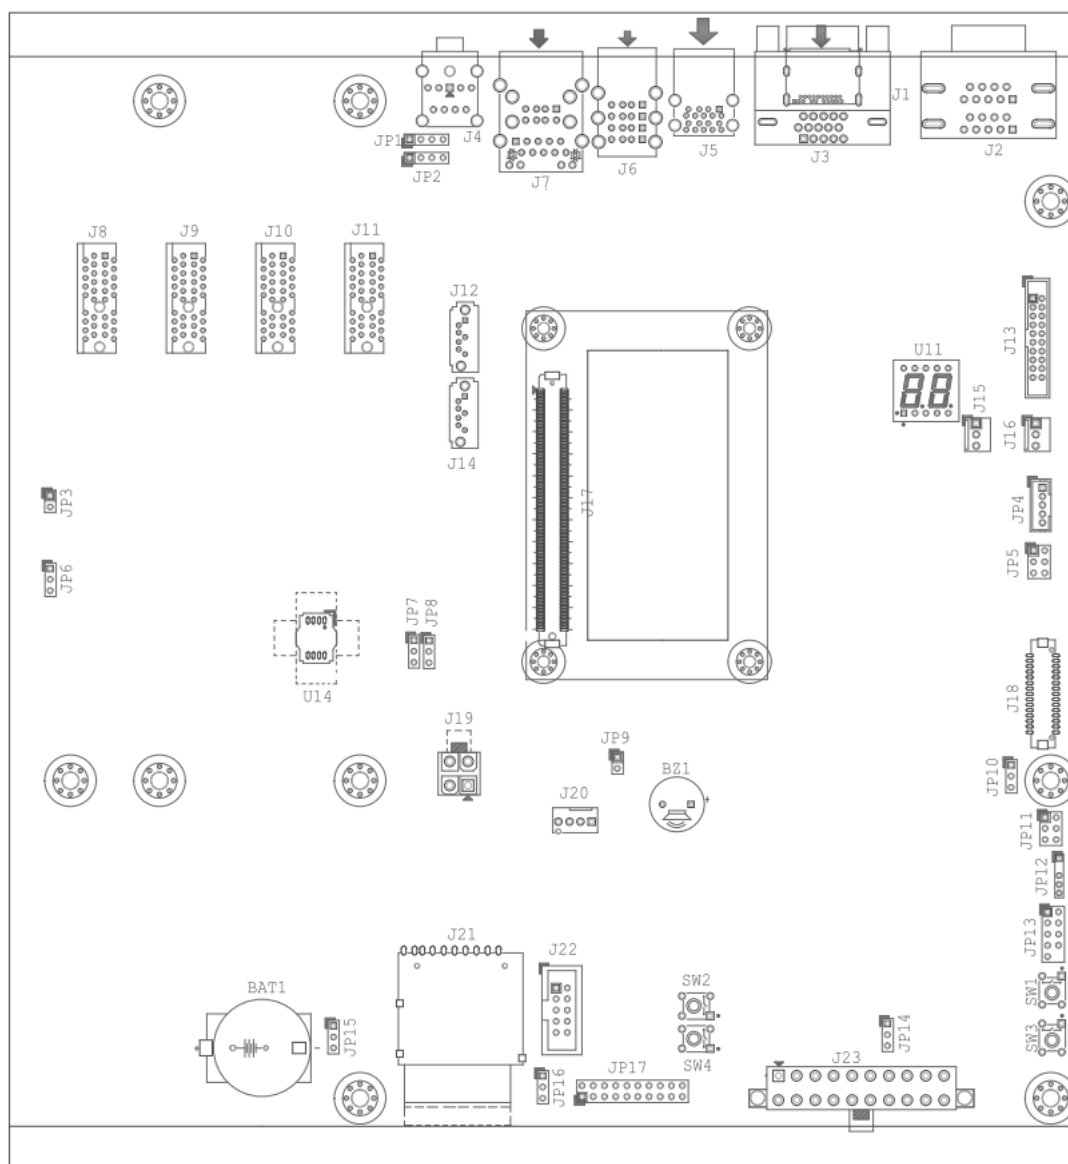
PCOM-CA00 Jumper & Connector Location
